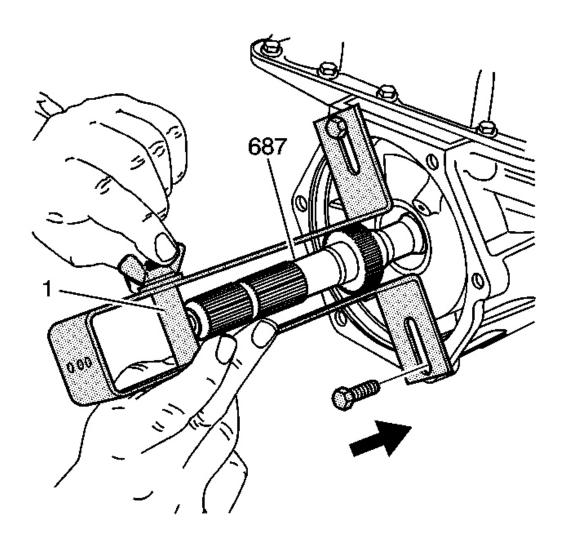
Identifying Special Tool J29837-A & Output Shaft O-Ring Seal Courtesy of GENERAL MOTORS CORP.
